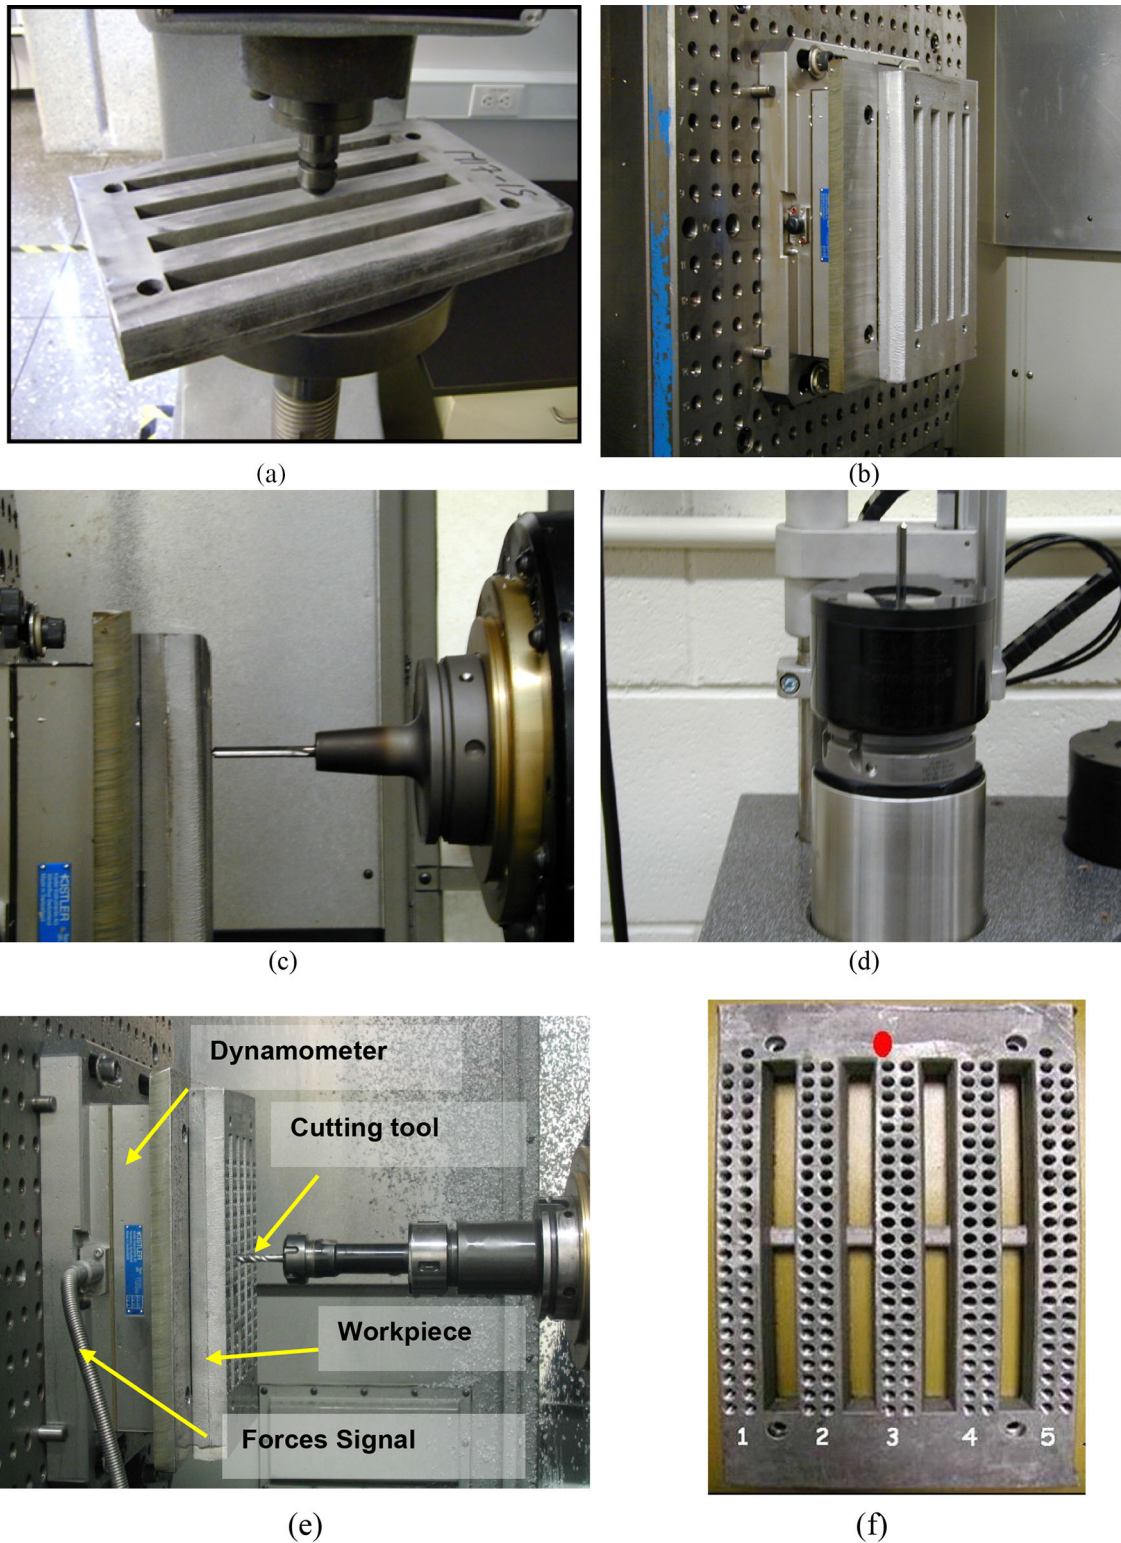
Drilling and tapping experimental setup: (a) hardness measuring, (b) sample and dynamometer cable setup, (c) horizontal machining setup, (d) tool removal during cooling cycle, (e) photograph showing experimental setup; (f) drilled Al cast block.
